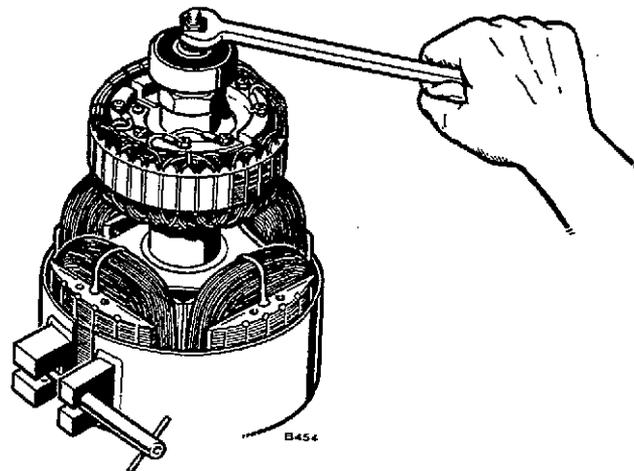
ROTOR THROUGH-STUD NUT REMOVAL
